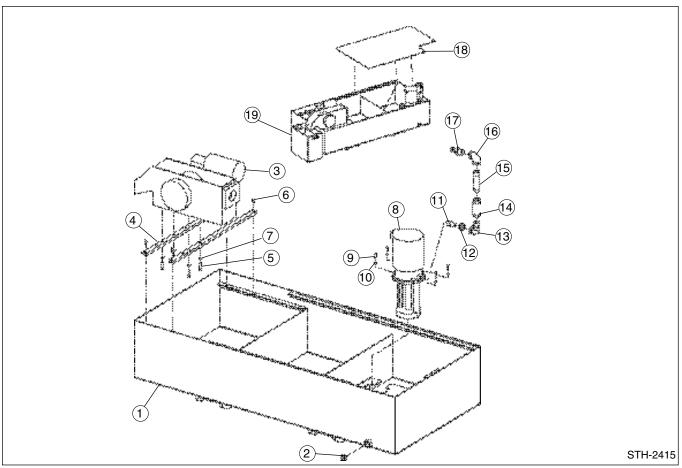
FIGURE N - COOLANT TANK ASSEMBLY, 235L SKID TYPE
